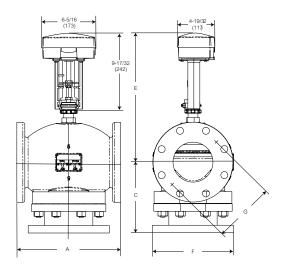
M1500A Series U-Bolt-style Flanged 3-Way Globe Valves
